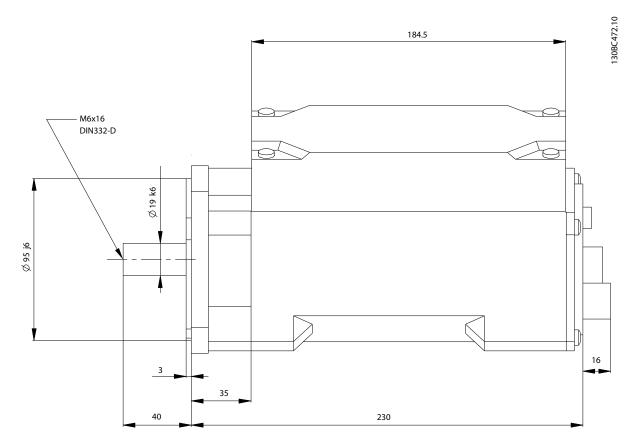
Side View: Servomotor with IEC Flange, without Brake
